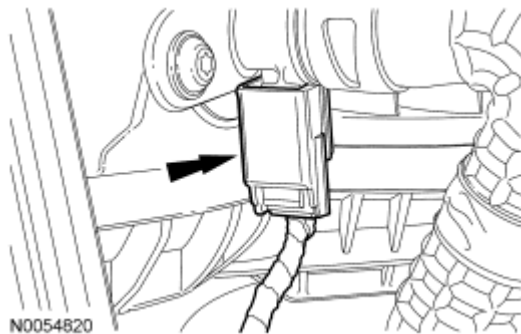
Identifying Positive Crankcase Ventilation (PCV) Fitting Electrical Connector
